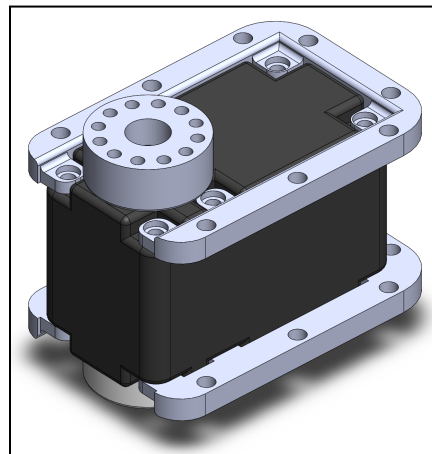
HerkuleX DRS-0201 Motor CAD with the Motor Adapter Prints Attached reproduced as is from [10]
